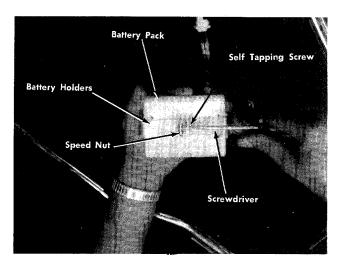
ASSEMBLY OF BATTERY HOLDERS
